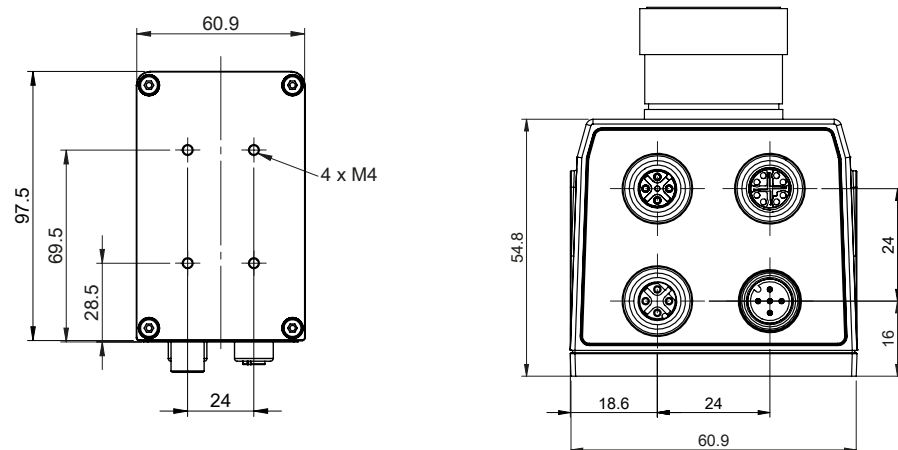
Mechanical connection at rear/bottom (dimensions in mm)
